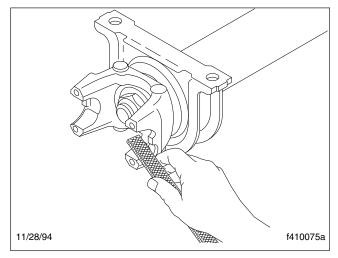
, Removing Burrs From a Half-Round End-Yoke Cross-Hole
